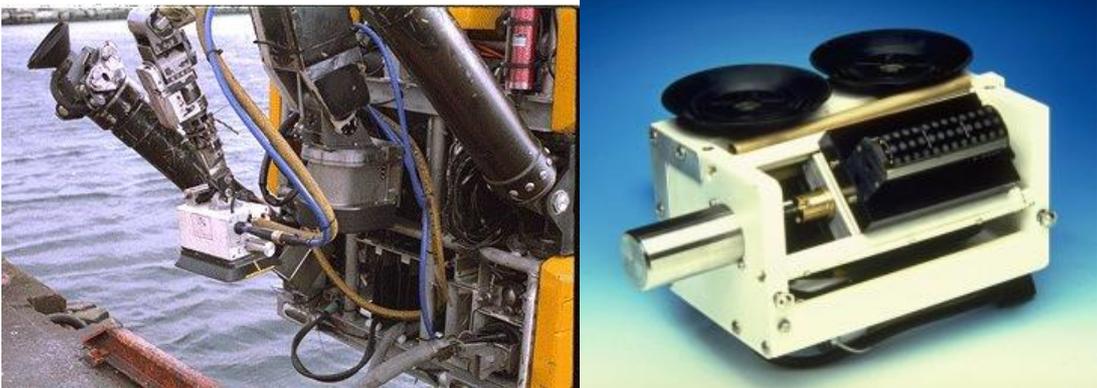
ACFM array probe for butt welds mounted on ROV (left); probe for fillet welds (right)
